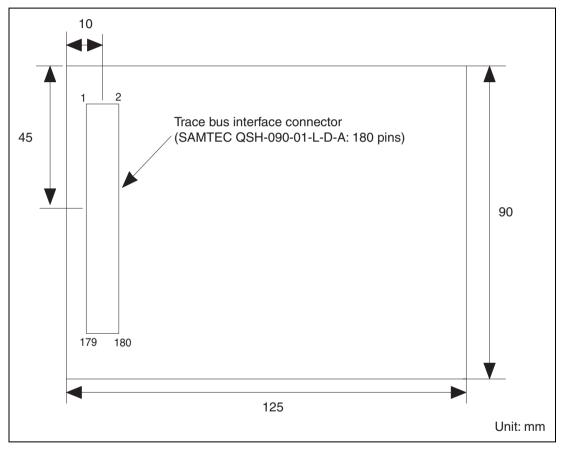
External Dimensions of the Trace Unit (on which the Connector is Installed)
